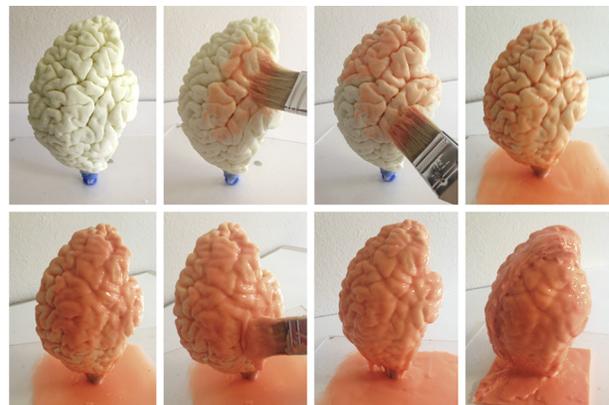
Silicone mold for gelatin model. Flexible brush-on molds were created on the 3-dimensional–printed model using a brushable silicone rubber along with a mother mold to maintain structural integrity while casting.
